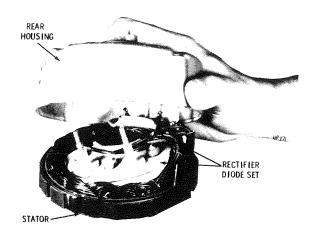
REAR HOUSING & DIODE TERMINAL SEPARATION
